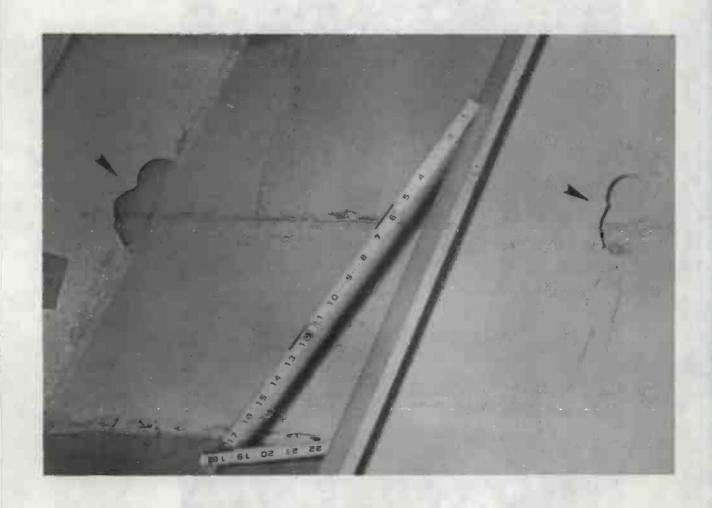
SOUND WELD CLEARANCES ON A TANKER
